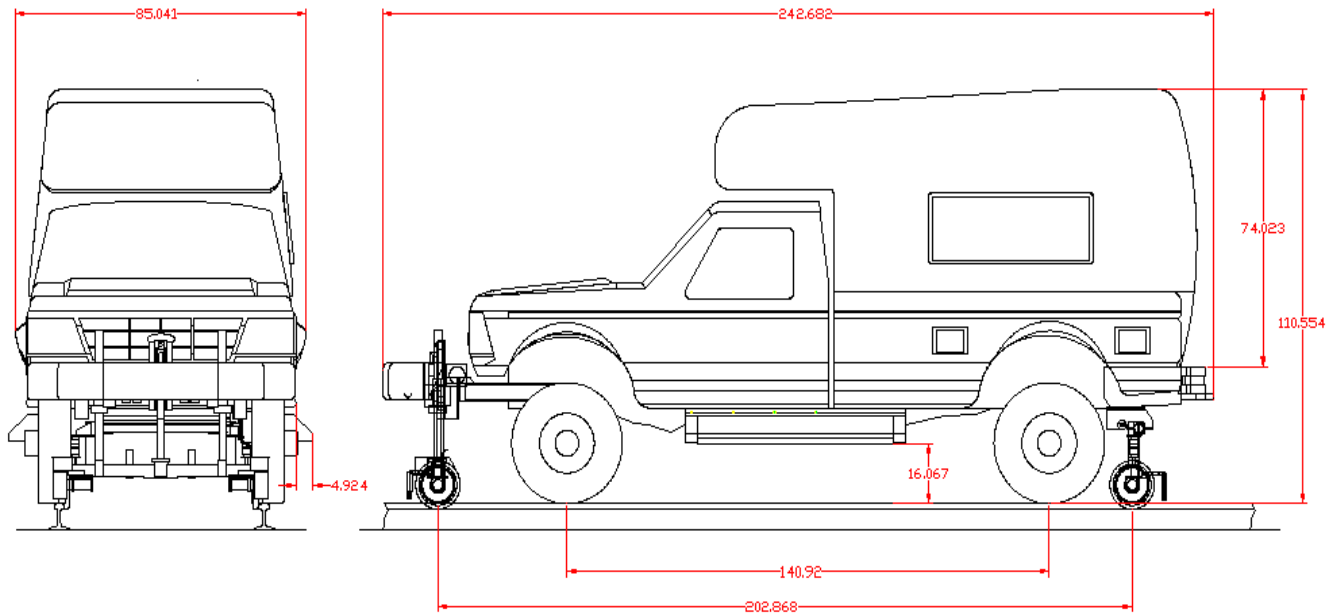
Overall dimensions (in inches) of the inspection vehicle
